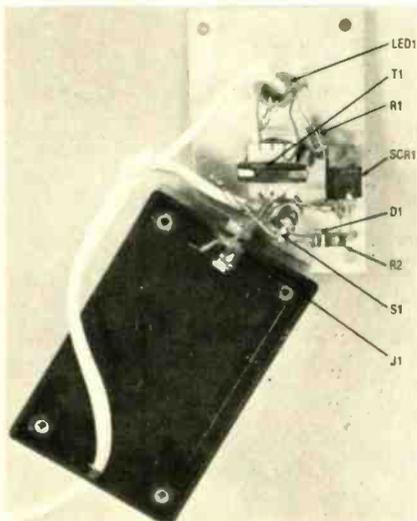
LAYOUT shows how all the components fit easily into a 3 × 2 × 1-inch enclosure.
